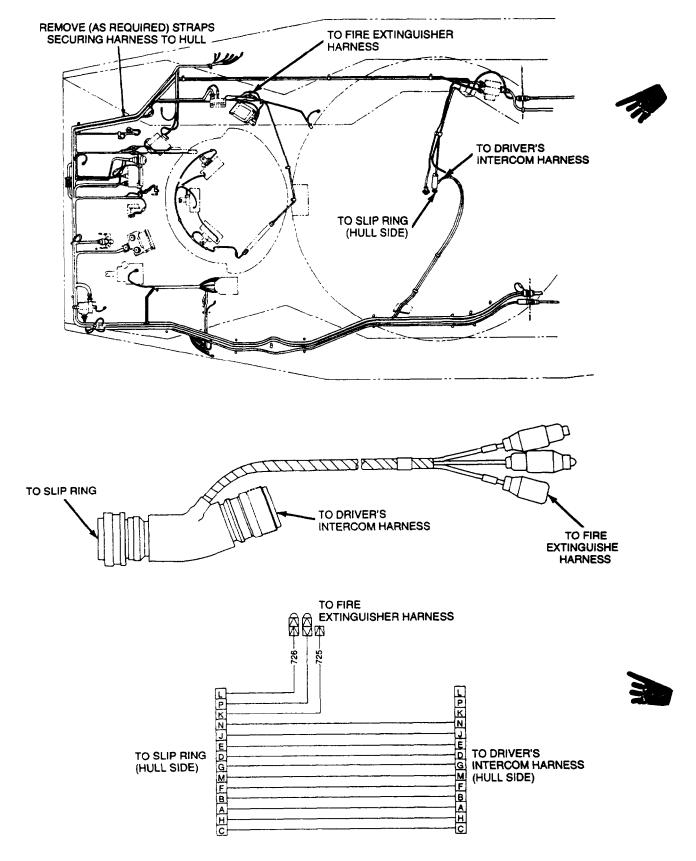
Removal/installation -slip ring-to-crew compartment fire extinguisher wiring harness.
